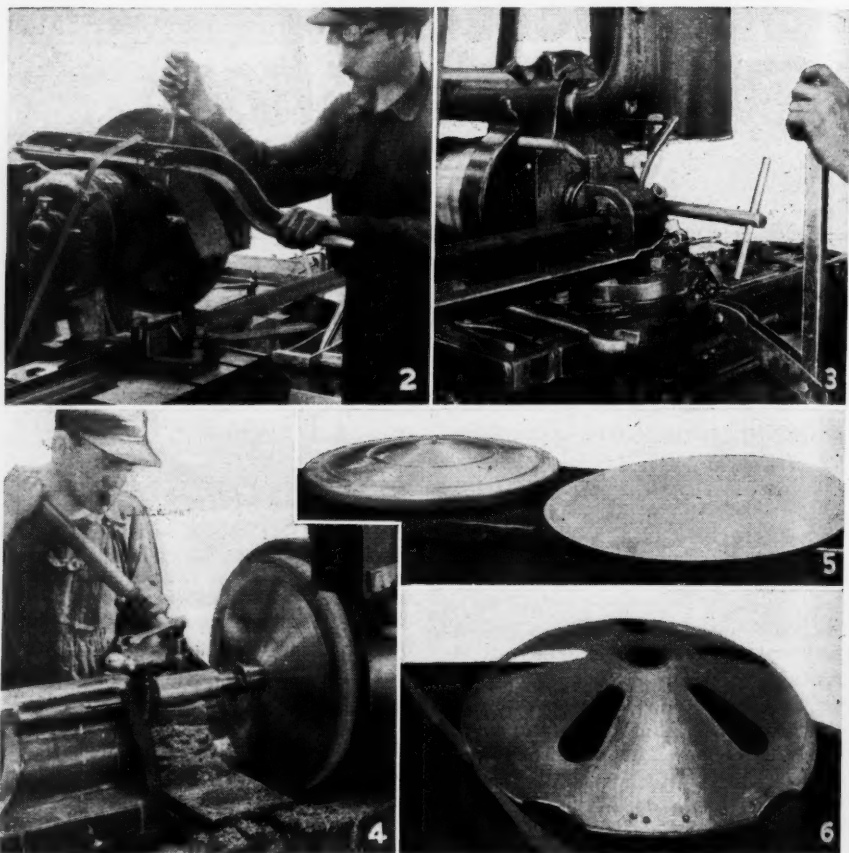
All tubing for the fuselage is cut to length in this cold saw. Fig. 3—The ends of the tubing are cut to the correct angles by sawing in this milling machine. Fig. 4—Spinning a wheel faring to shape. All farings and nose cowlings are shaped by the spinning process. Fig. 5—At the right is a blank of sheet aluminum to be made into a wheel faring, and at the left is the wood form upon which the piece is to be spun to shape. Fig. 6—Here is a nose cowling that has been shaped by the spinning process described above.
